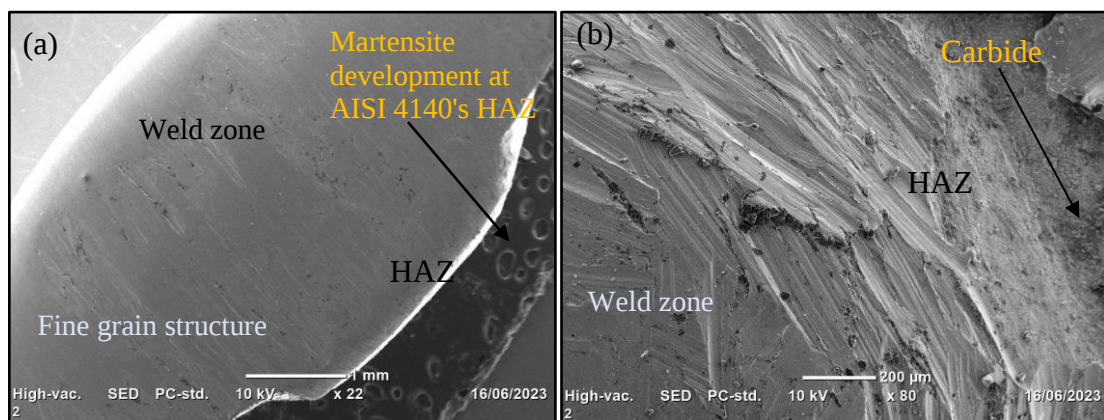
microstructure representing weld zone – HAZ of AISI 4140 and SS 316, a) cross-section of weldments, b) surface bead of weldments sample number 7
